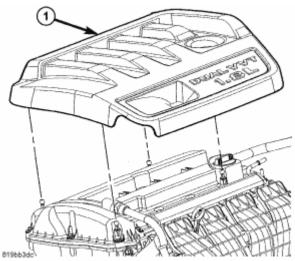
ENGINE COVER Courtesy of CHRYSLER LLC
